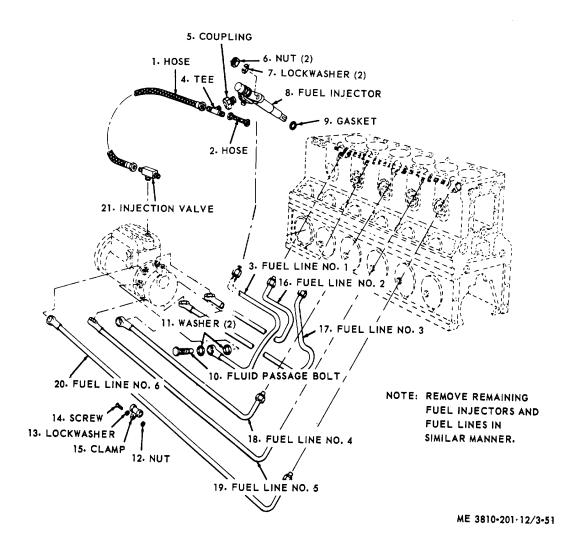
Fuel injector and fuel line removal and installation (engine model 687C-18-ES).
